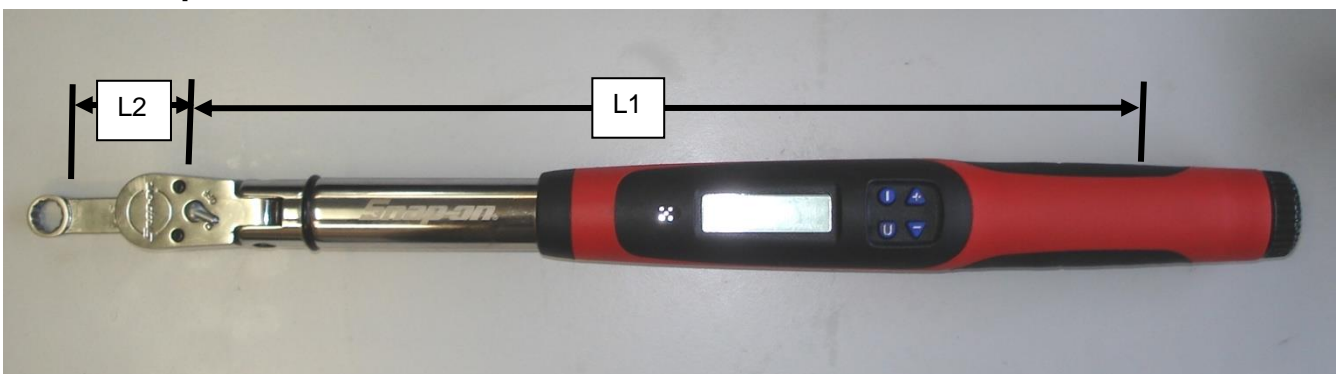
Torque Wrench & Crowsfoot Adaptor Setting 1
